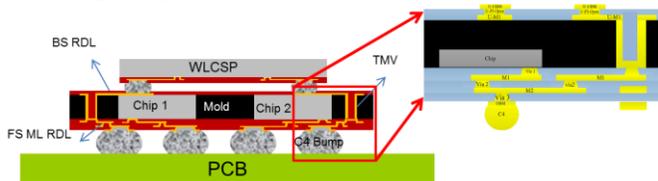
Cross-sectional view of multi-chip Mold-First FOWLP PoP on PCB
